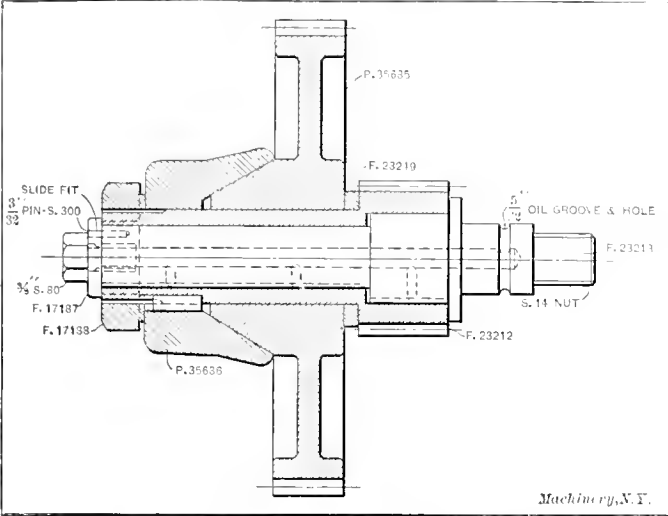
Assembly Drawing of Parts Classified in Fig. 6
